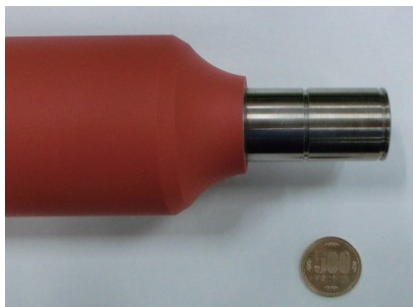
Optimized end shape of the C1100 upper pressure roller, resulting in a longer lifetime.
